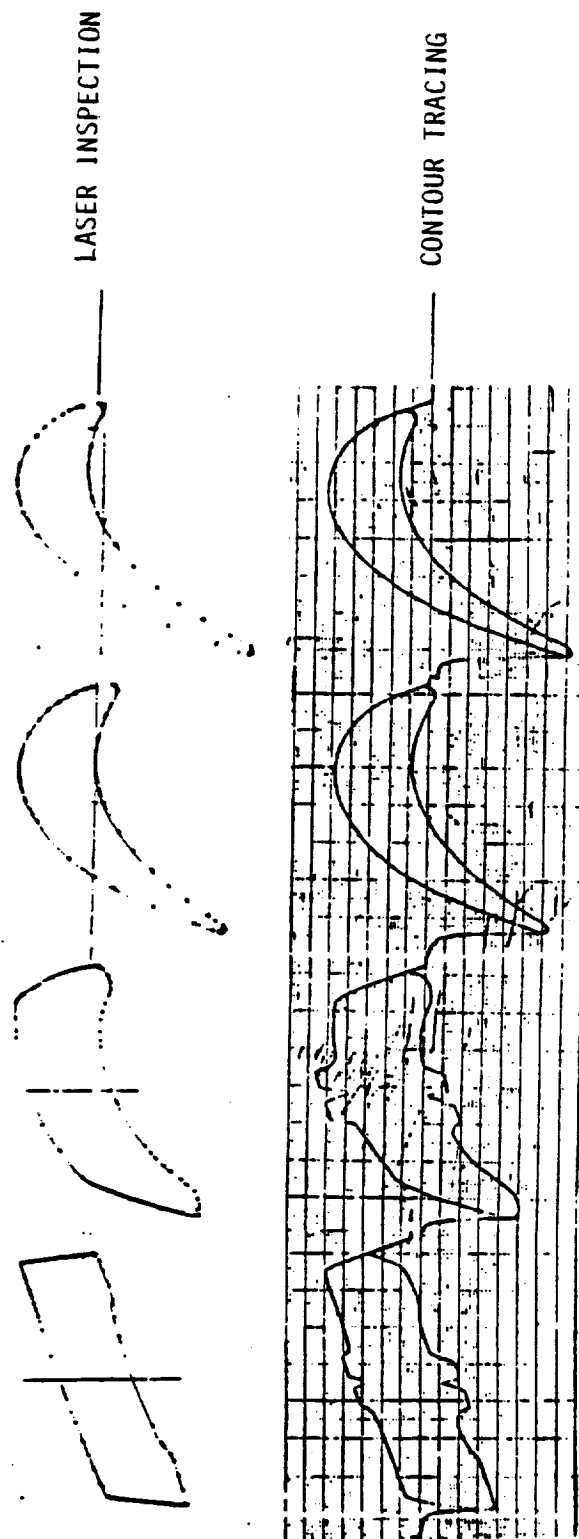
A Typical Output from Laser Machine and Tracing Machine of HP0TP Second Stage Blade
